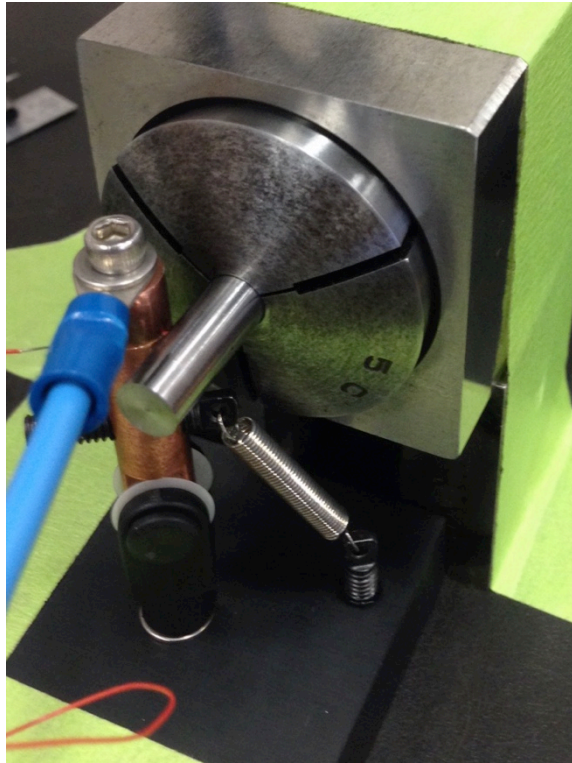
Thermocouple wire resistance welding fixture. The sprung copper fixture served as one electrode while the collet block was used to connect the second electrode.
